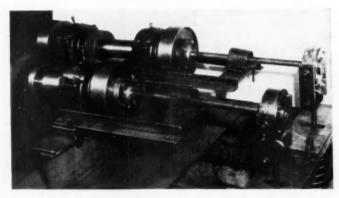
Fatigue machine for testing rear axle shafts (Timken Roller Bearing Co.)
